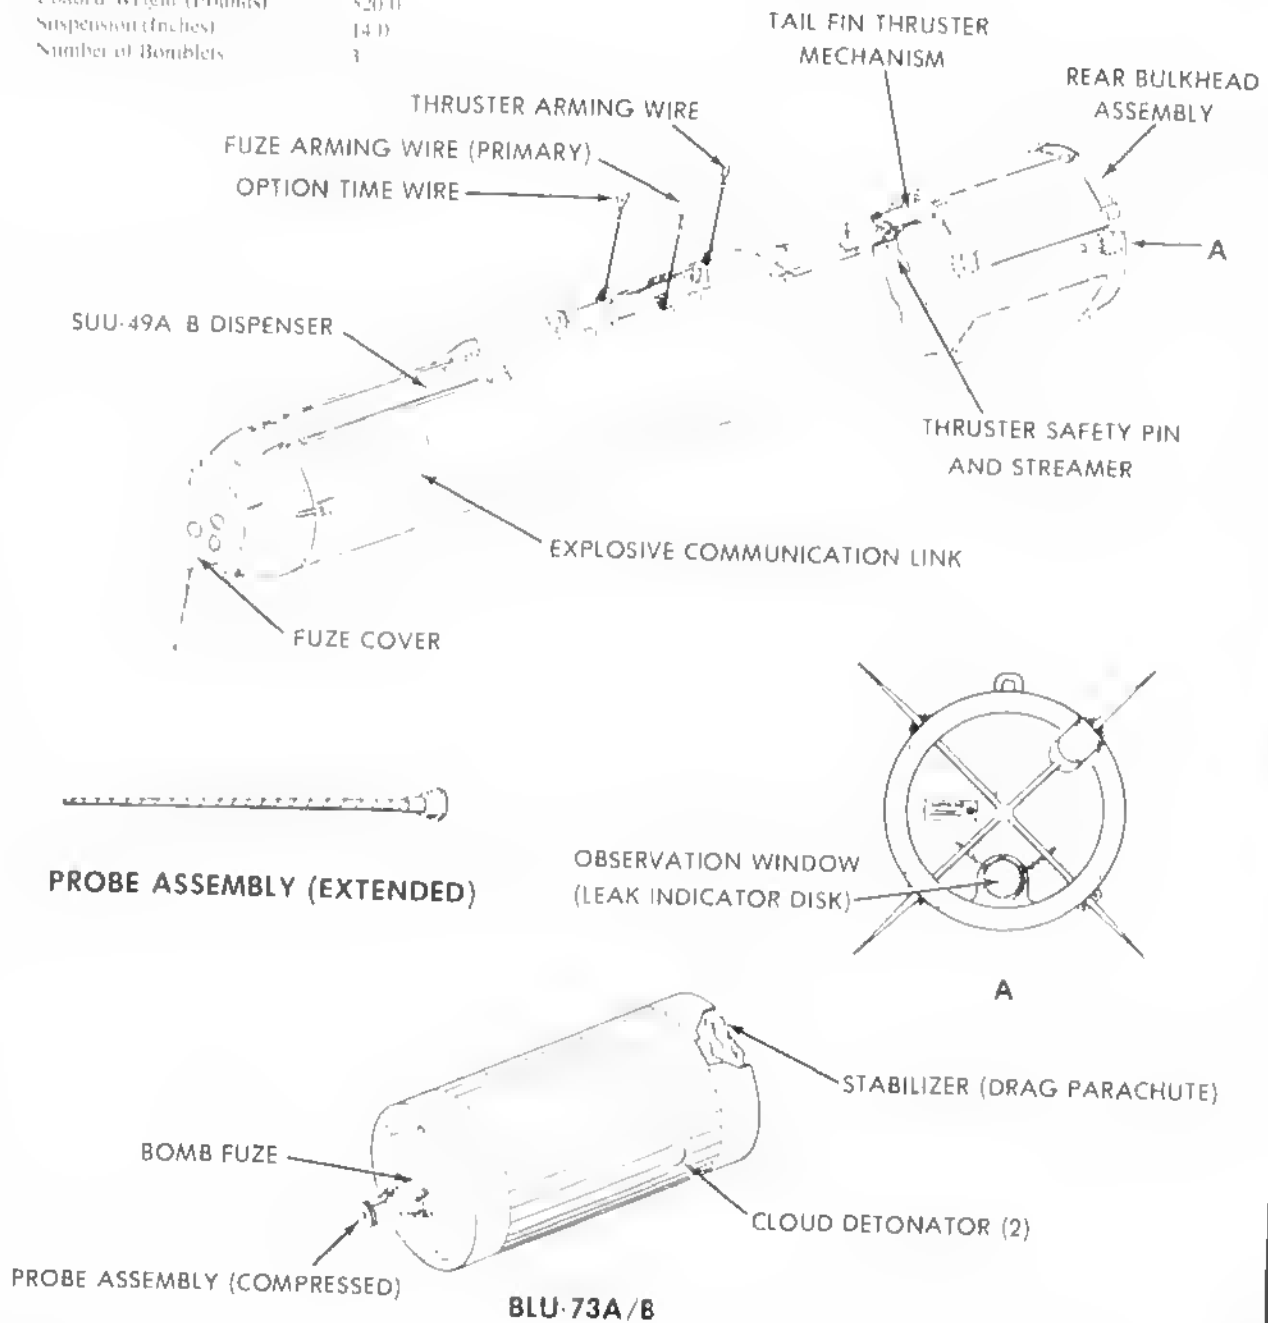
CBU-72/B Fuel-Air Explosive Bomb Cluster (FAE)
